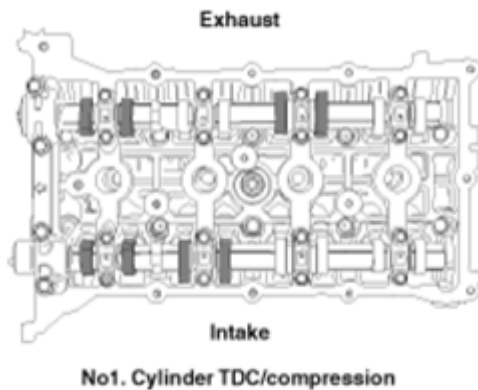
Identifying Intake & Exhaust Valves (No. 1 Cylinder At TDC)
